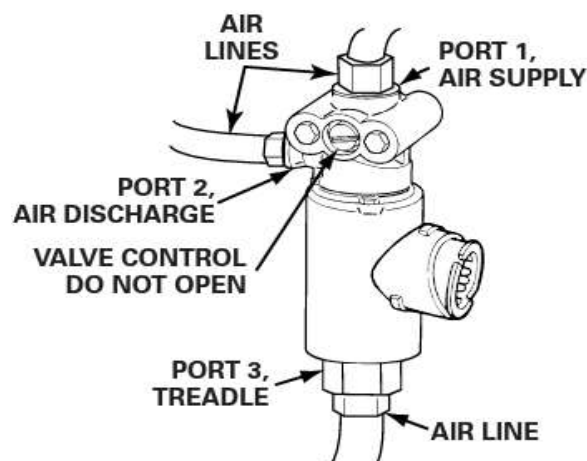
Plate I: Unplugging the Electrical Connector of Brake Pressure Sensor
